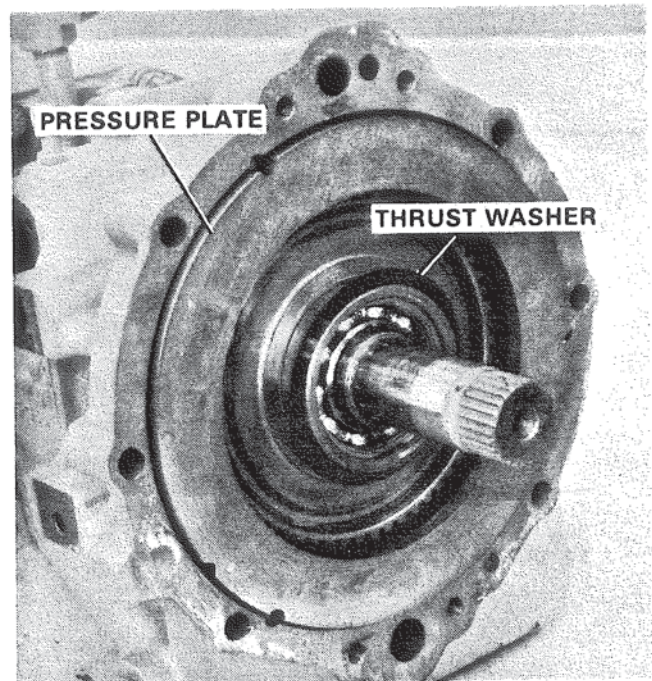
Installing Thrust Washer and Reverse Clutch Pressure Plate.
